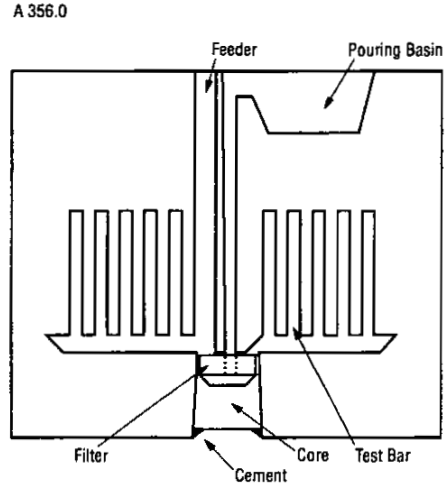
Schematic elevation view showing a typical installation of a ceramic filter in a mold (Ref. 39)
